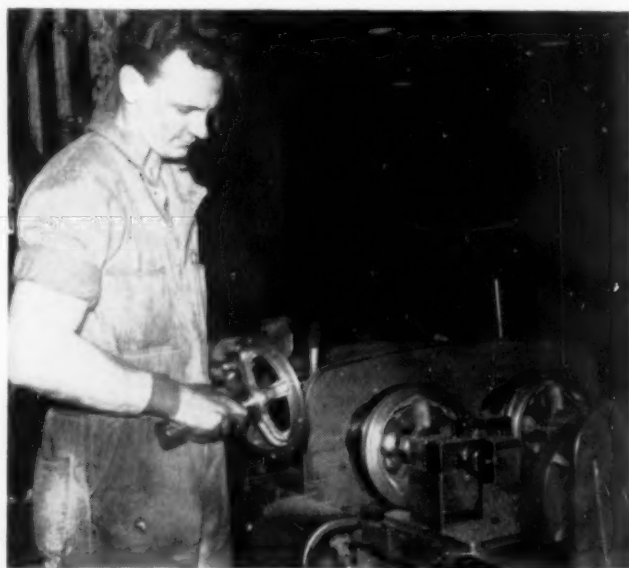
Carbide tools on this 4-spindle machine have reduced second operation machining time on bearing frame to 43 sec per piece.
